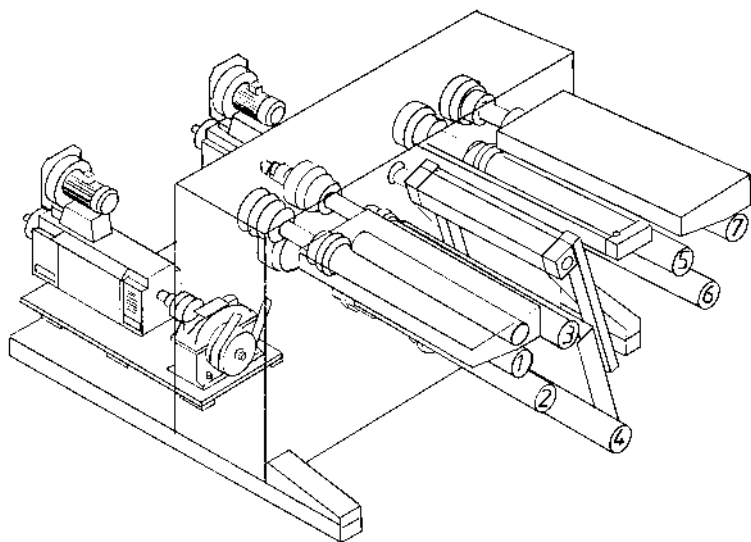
Drawing unit. (Courtesy of Liba Maschinenfabrik GmbH, Germany.)
